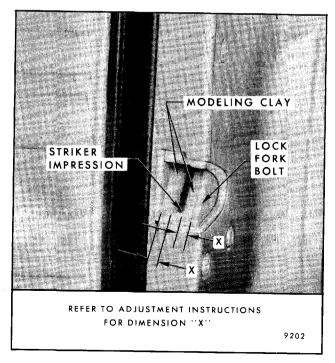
Lock-to-Striker Fore and Aft Adjustment
